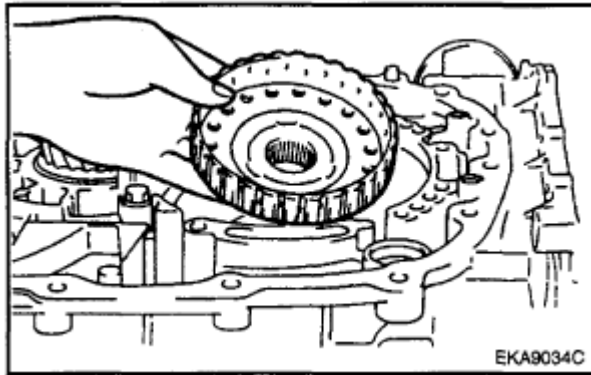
Identifying Reverse Clutch Reaction Plate And Clutch Disc Set
